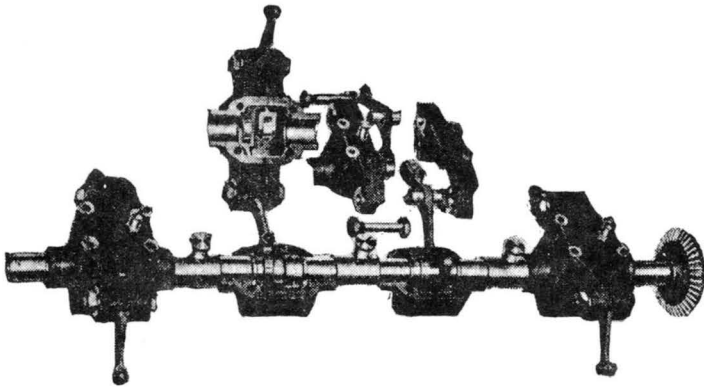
Camshaft, rocker arms and bevel gear by which the camshaft is driven.
